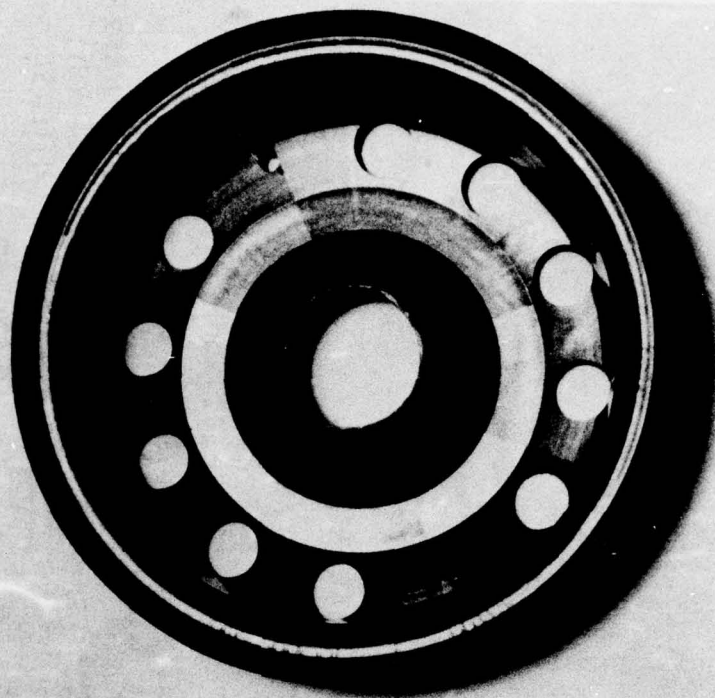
Machined Wheel Halves (Vacuum Bag Side)
